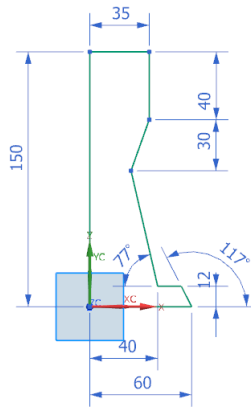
The completed sketch displayed after adding required constraints and dimensions
